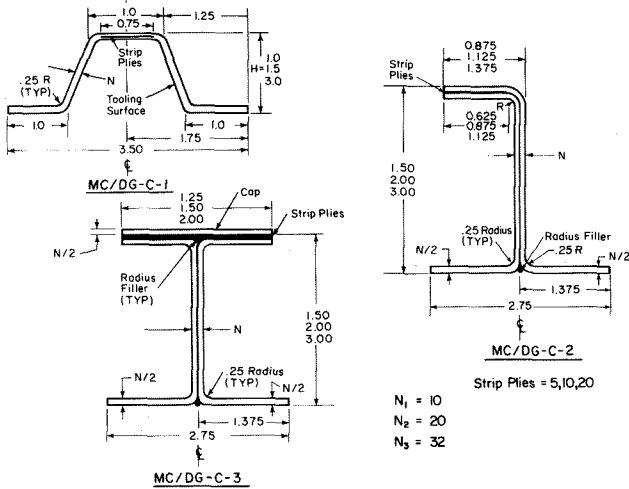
Examples of Structural Shapes Studied for Composite Section
